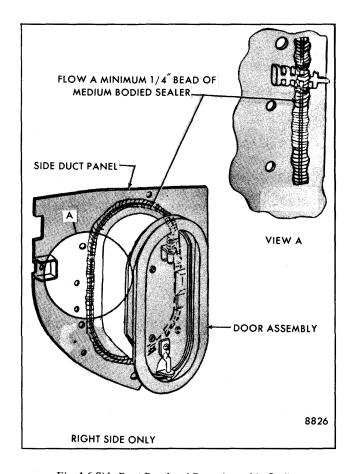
Side Duct Panel and Door Assembly Sealing
